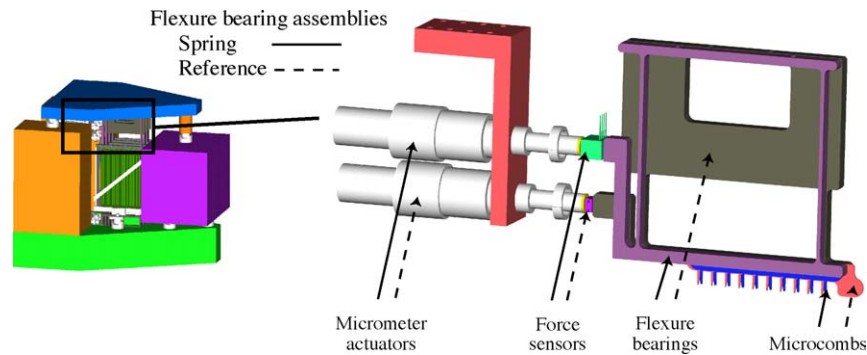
Depiction of the flexure bearing assembly containing microcombs, flexure bearings, force sensors, and micrometers.
